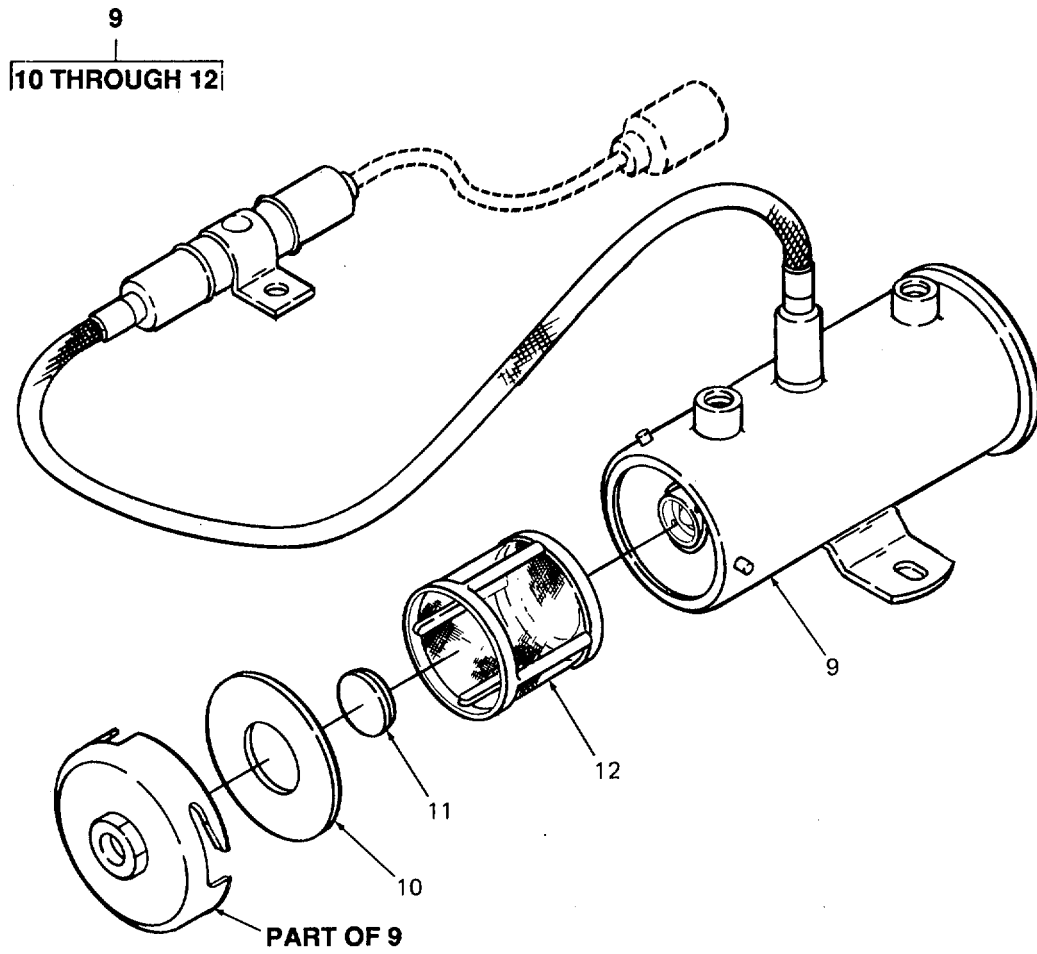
Fuel Pump, Strainer, and Components (Sheet 2)
